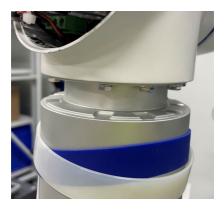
Remove the upper arm rubber ring and supporting ring
